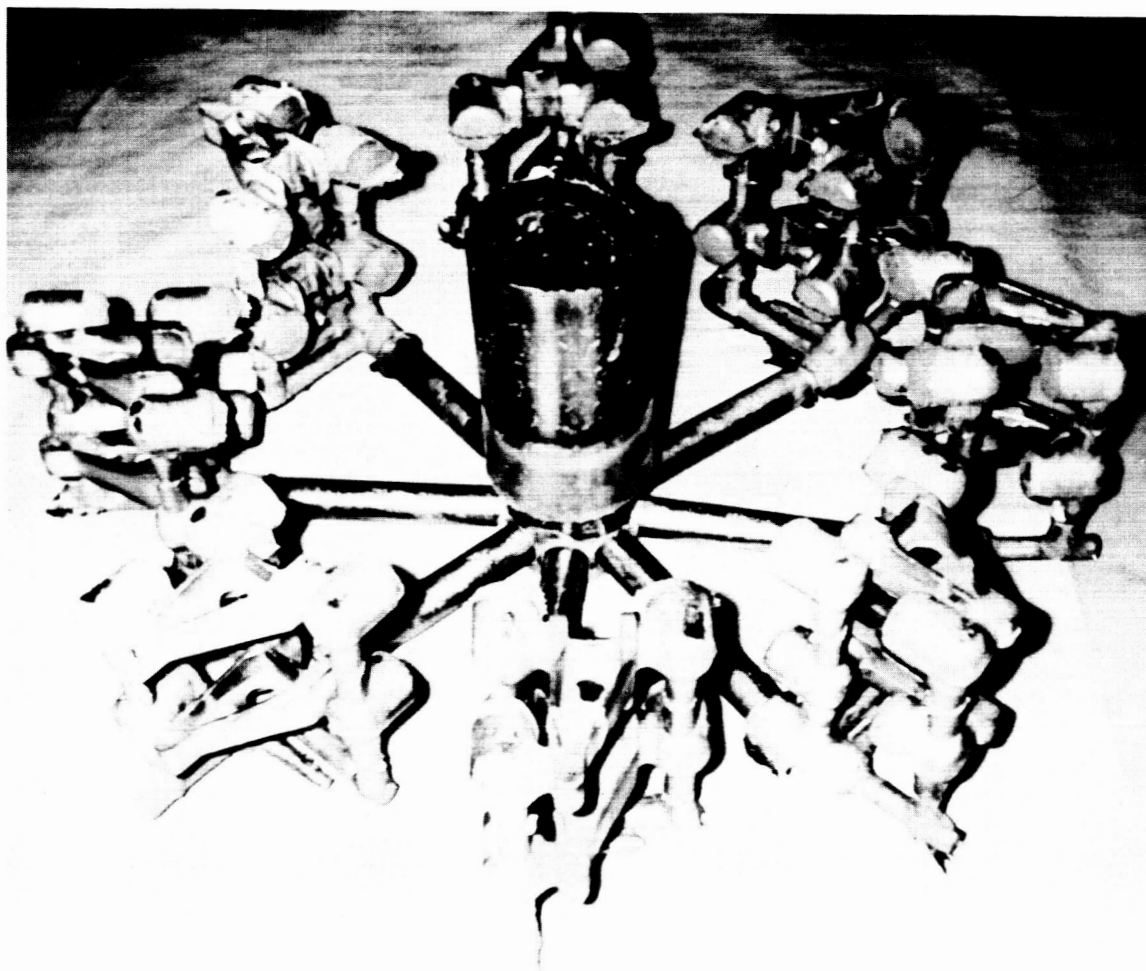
GATING AND RISERING ARRANGEMENT FOR CENTRIFUGE CASTING (REF. 4)
